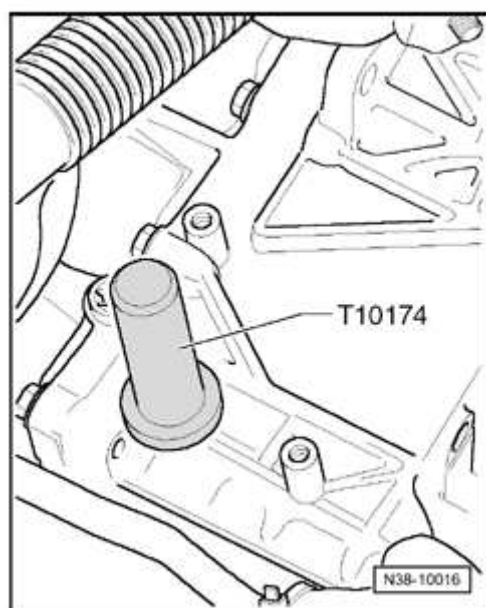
New Gasket Driven In Until Stop Using Thrust Piece T10174
